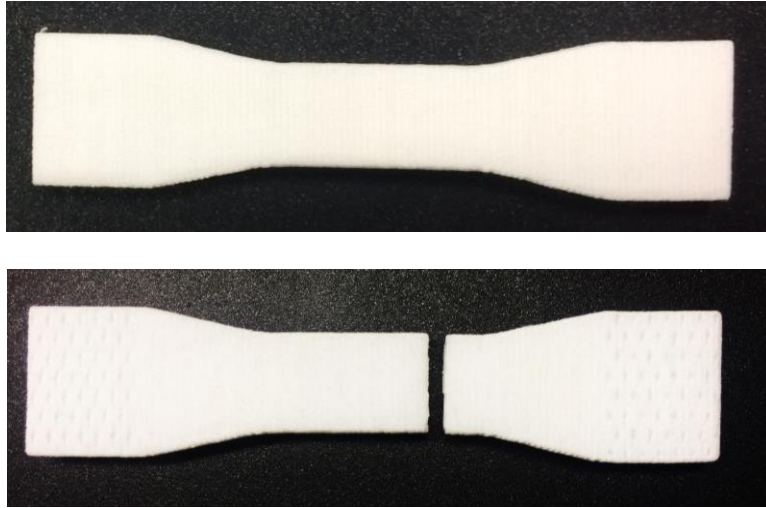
(TOP) Tensile Bar before Testing (BOTTOM) Fractured Tensile Bar.
